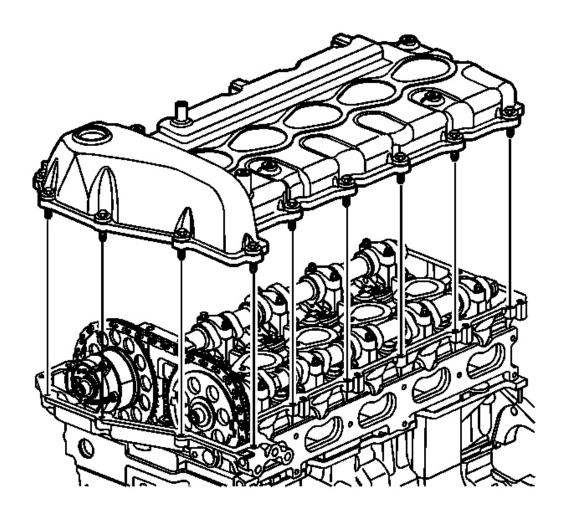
View Of Camshaft Cover (Valve Cover) Courtesy of GENERAL MOTORS CORP.
